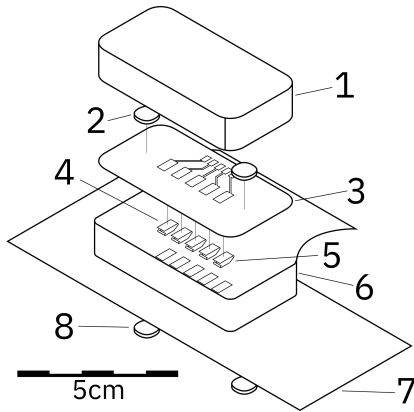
Design of the test device. (1) Foam backing, (2) Magnets  $\times 2$ , (3) Flexible PCB connecting contacts to test pads, (4) Spring finger connectors, pin 1, (5) pin 5, (6) Fabric cover, (7) Copper sheet, (8) Magnets used to hold device down  $\times 2$ .
